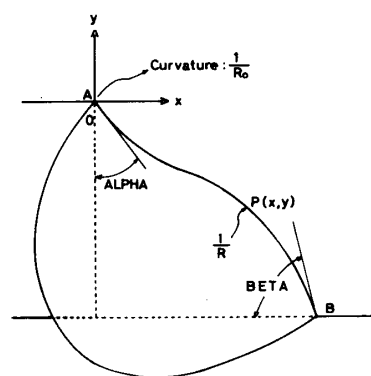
Two dimensional model of molten pool in case of horizontal fillet welding
